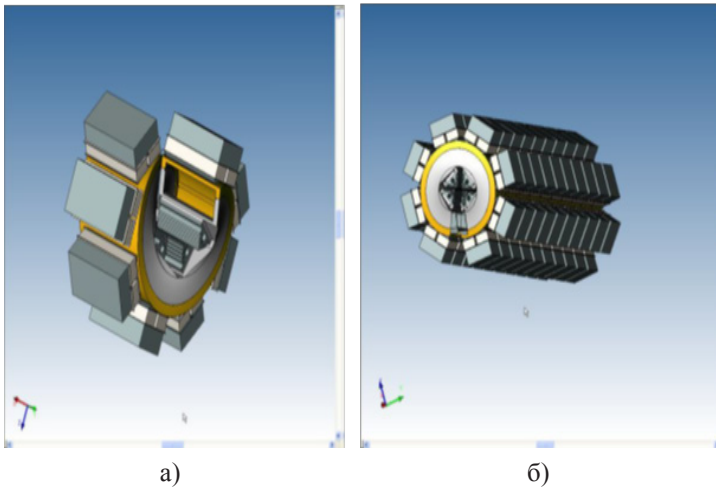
TMAS: a) - single turn; b) - separator assembly
